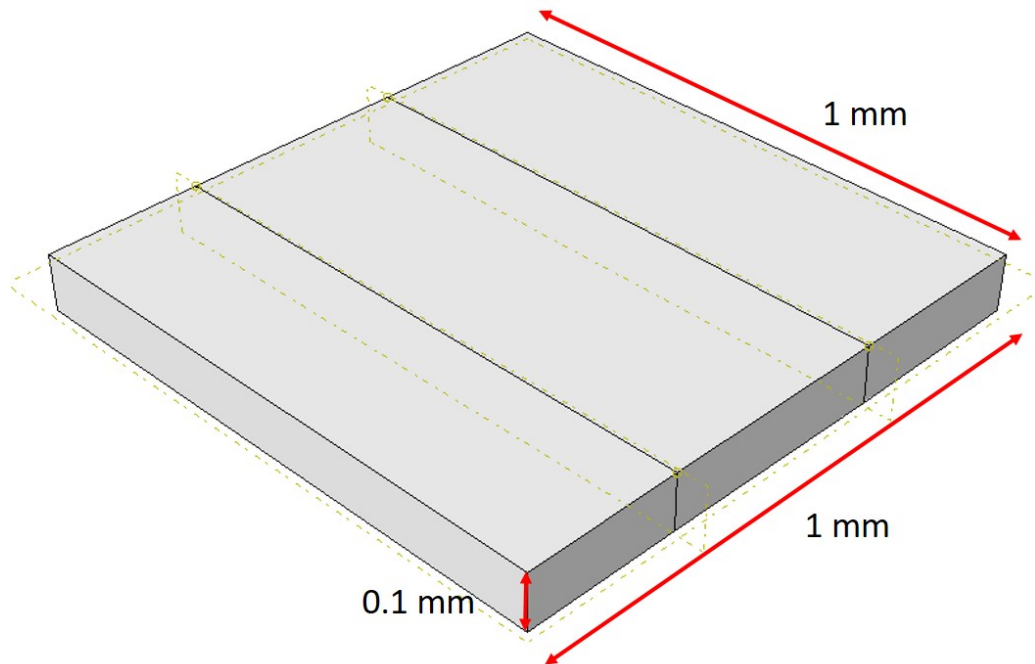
Workpiece dimensions of ALE conical and pyramidal 3D scratch models
